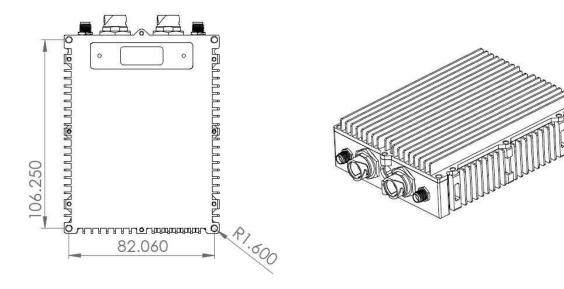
SC3822 Mechanical Drawing (top) and Mounting Pattern (bottom)
